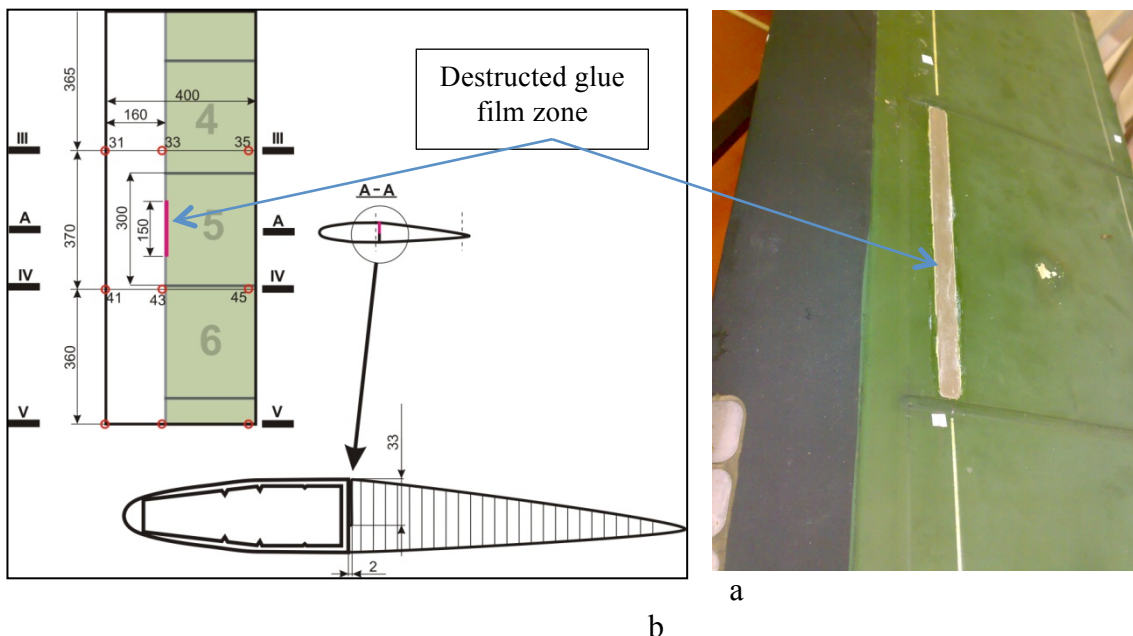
Scheme of a blade section and a place of defect (a) and the view of the blade after restoration (b)
